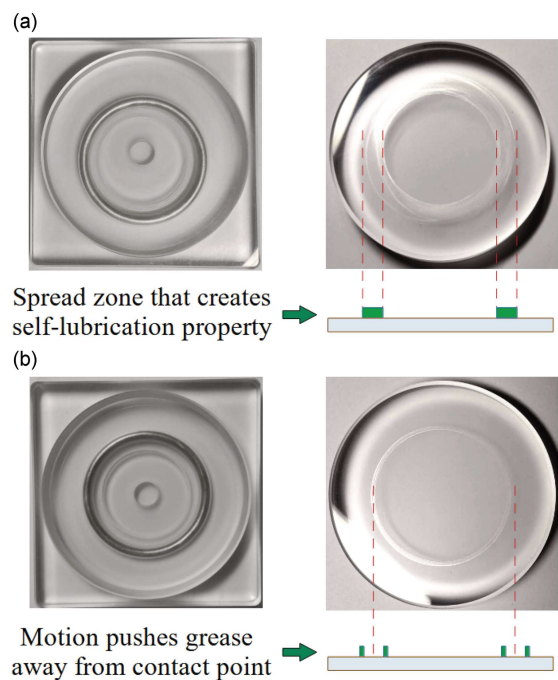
Test jig for evaluation of the eccentric O-ring rotating face seal idea showing the spread application zone (a) compared with typical concentric O-ring approach (b).
